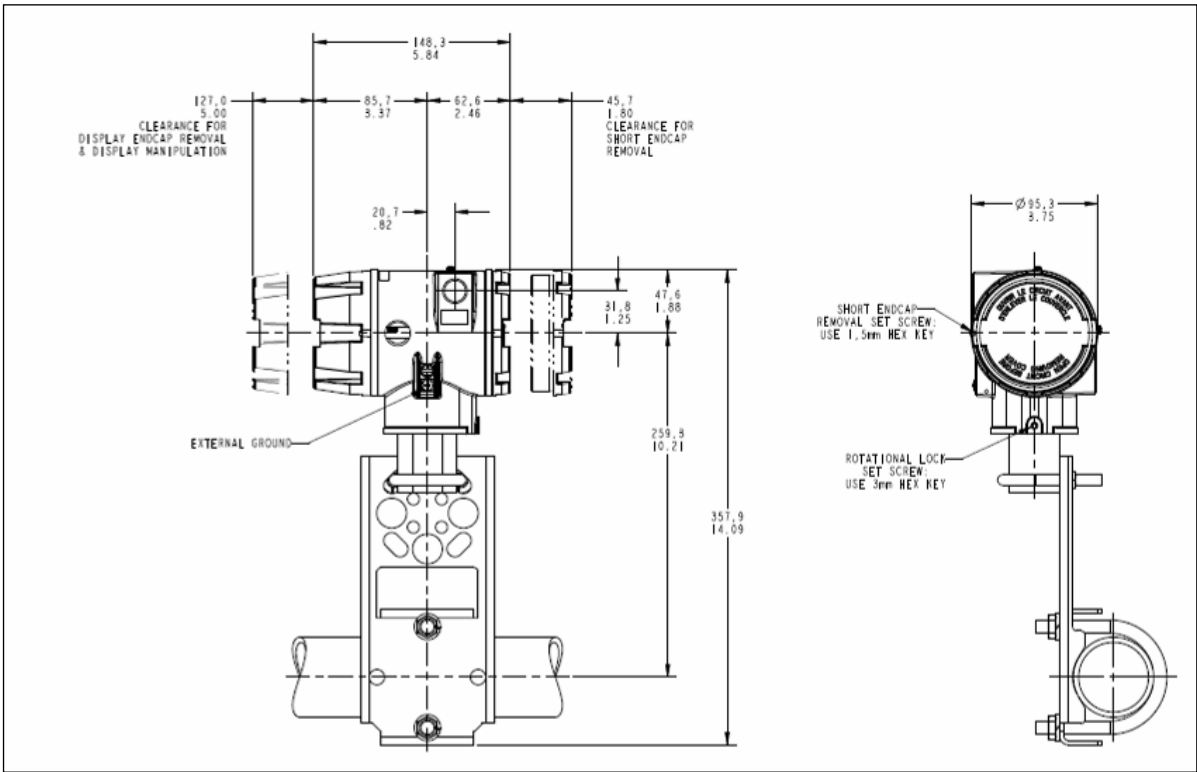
SmartCET horizontal pipe mount using flat bracket.
